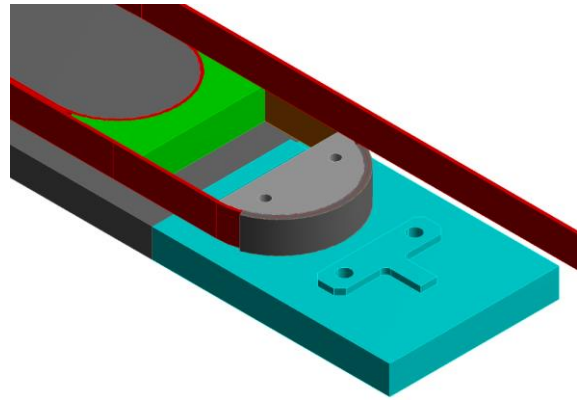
Turning of the crimped cables around the outer pressing plate.
